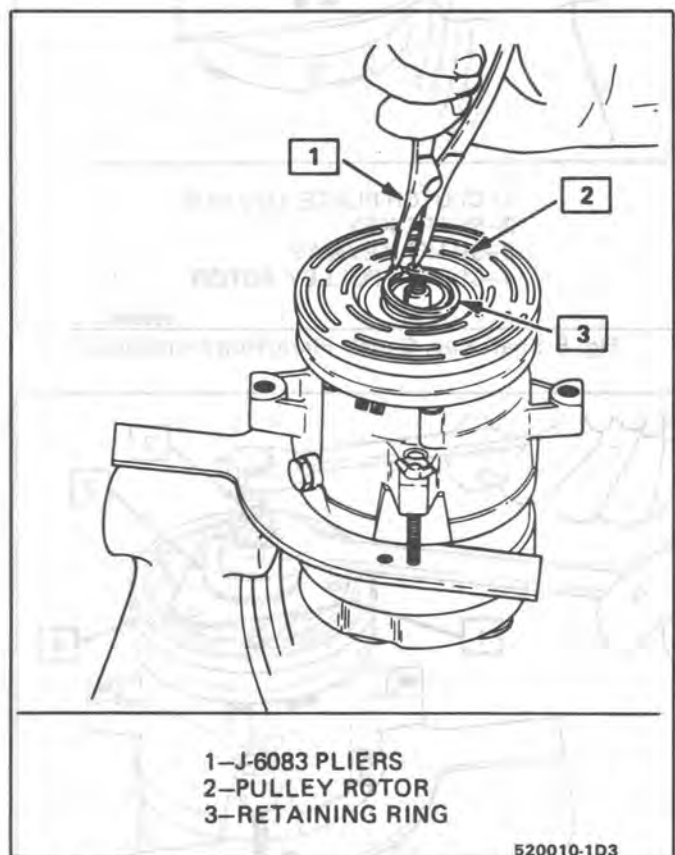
Removing Pulley Rotor & Bearing Assembly Retaining Ring
